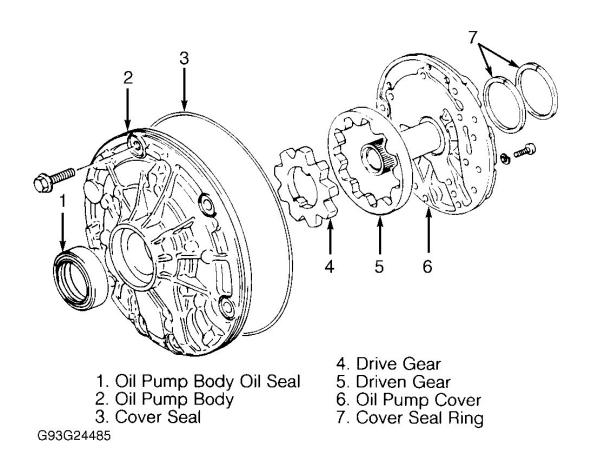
Exploded View Of Oil Pump Courtesy of SUZUKI OF AMERICA CORP.
